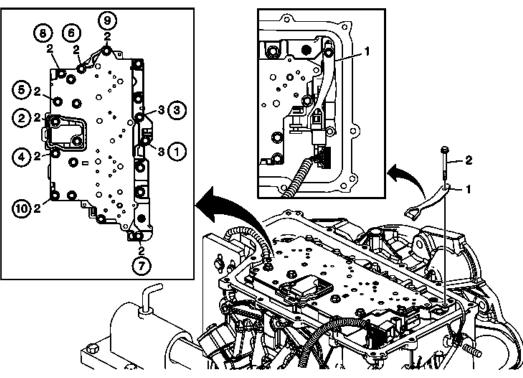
Output Speed Sensor And Control Valve Body Assembly Courtesy of GENERAL MOTORS COMPANY
